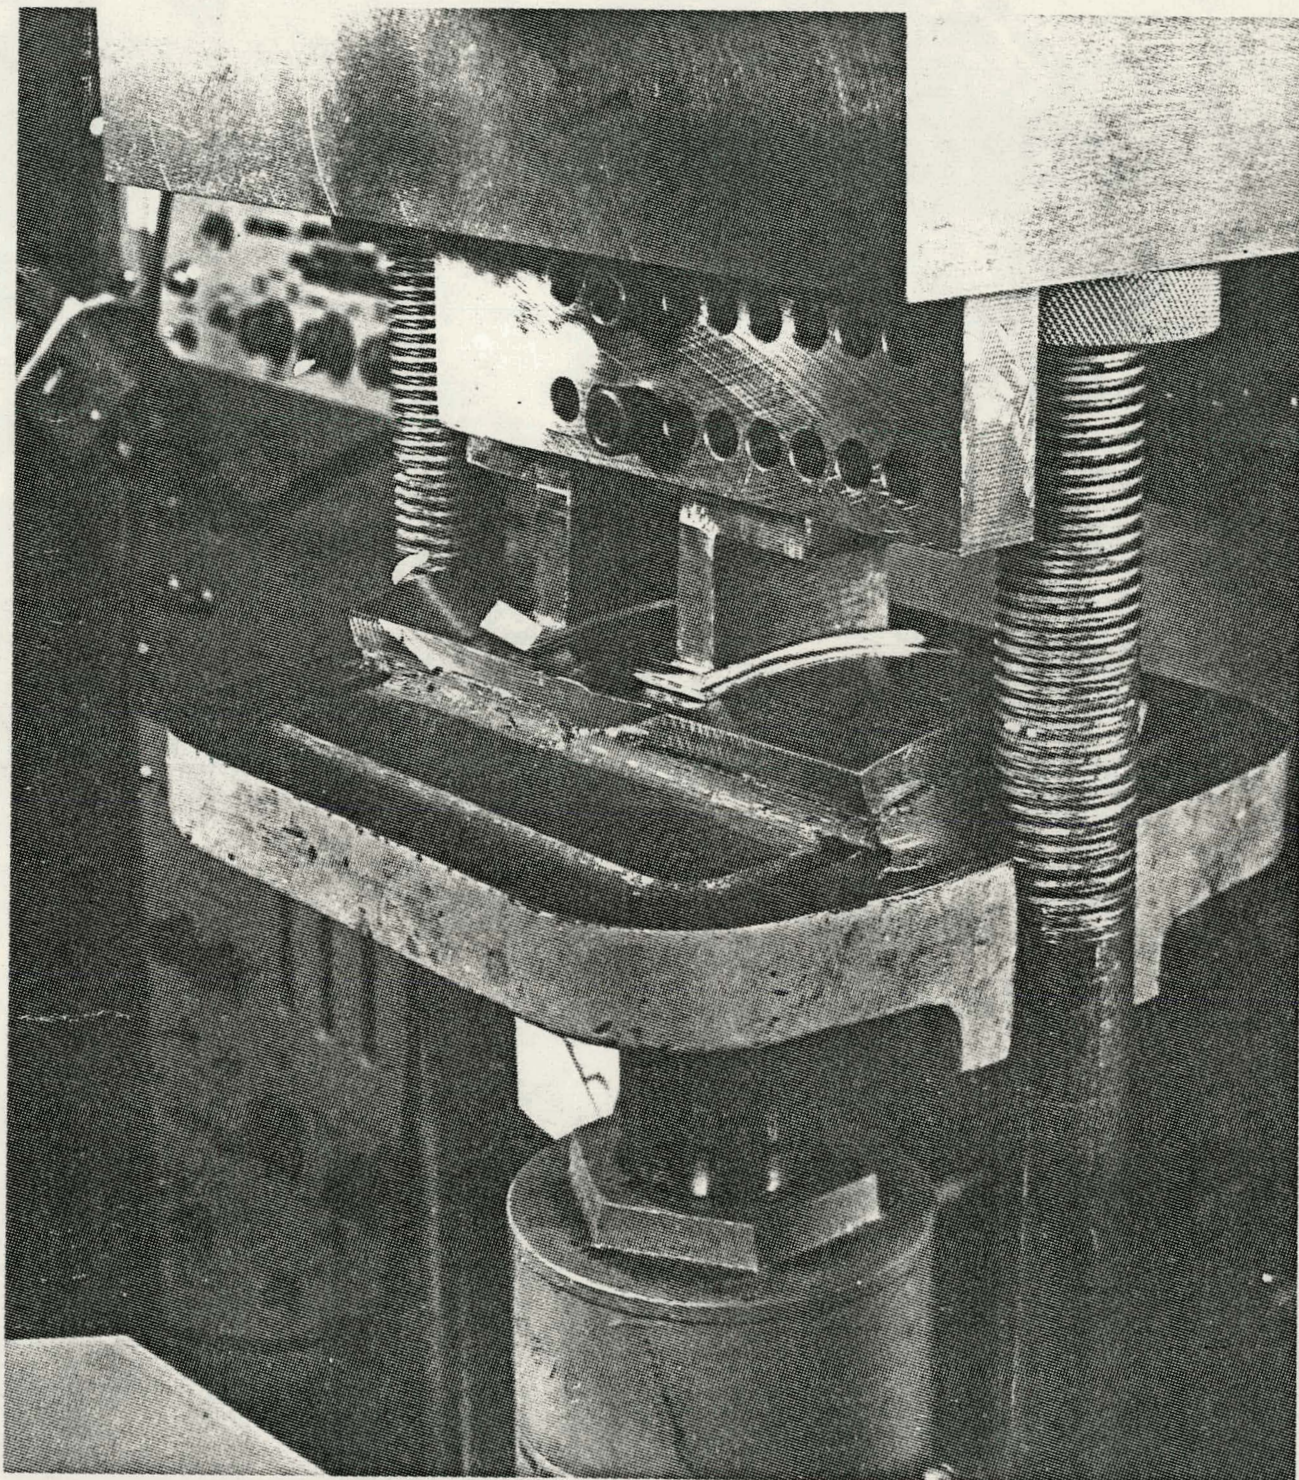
Electrodes and contact assemblies in-place and ready for electro-thermal NDT of a stainless steel pipe weld specimen.
